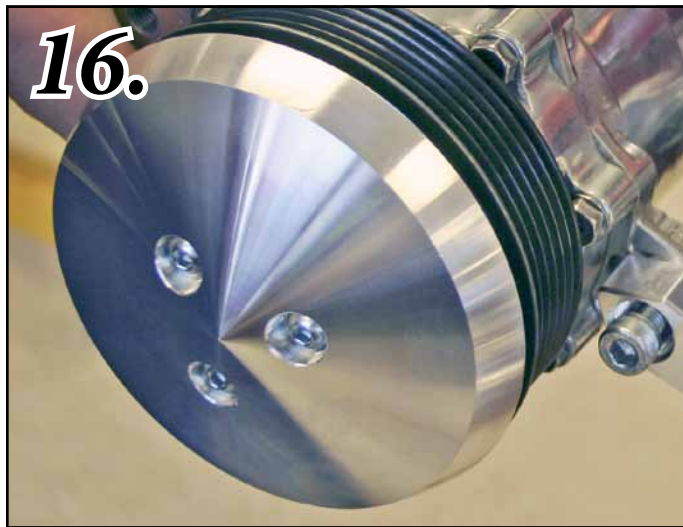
Place the compressor clutch cover (394-A) onto the compressor clutch and align. Thread the three (3) (S520) M6 - 1.0 x 16mm Button Head Bolts. through the cover and into the clutch and tighten. Caution - Do not over-tighten!
